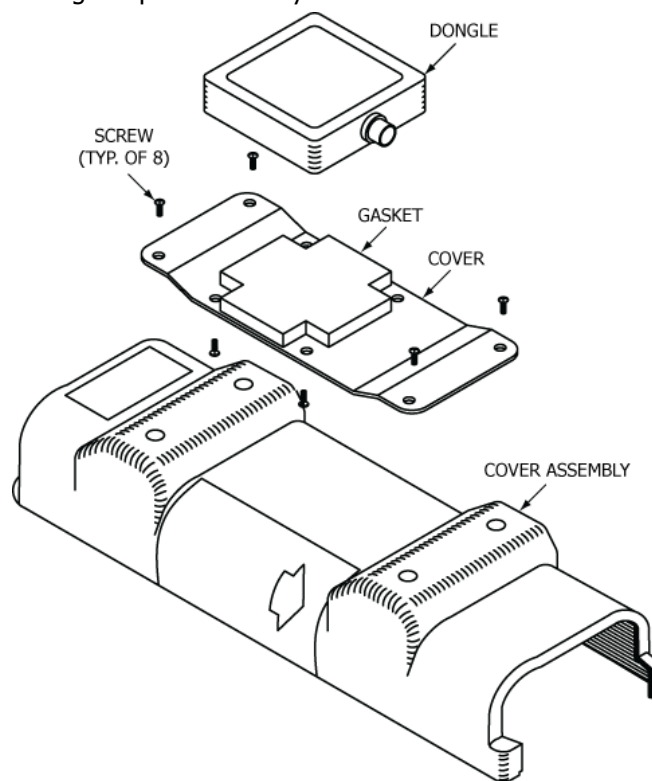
DGL-1 (Dongle) Programming Adapter Assembly
